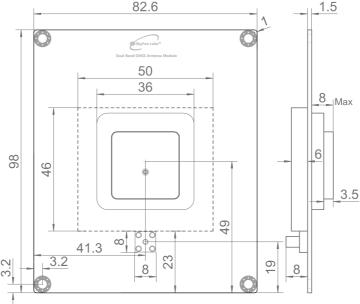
piPATCH-L1L2 Dimensions drawing in millimeters. Detailed STEP file available for download.
